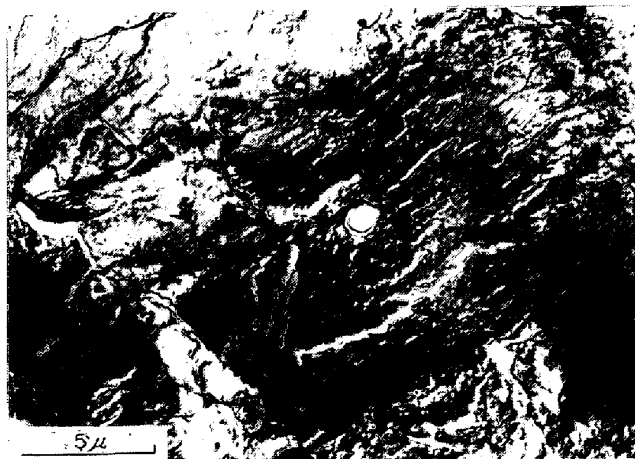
Cleavage striation on the fatigue fracture surface of T-7 specimen.
